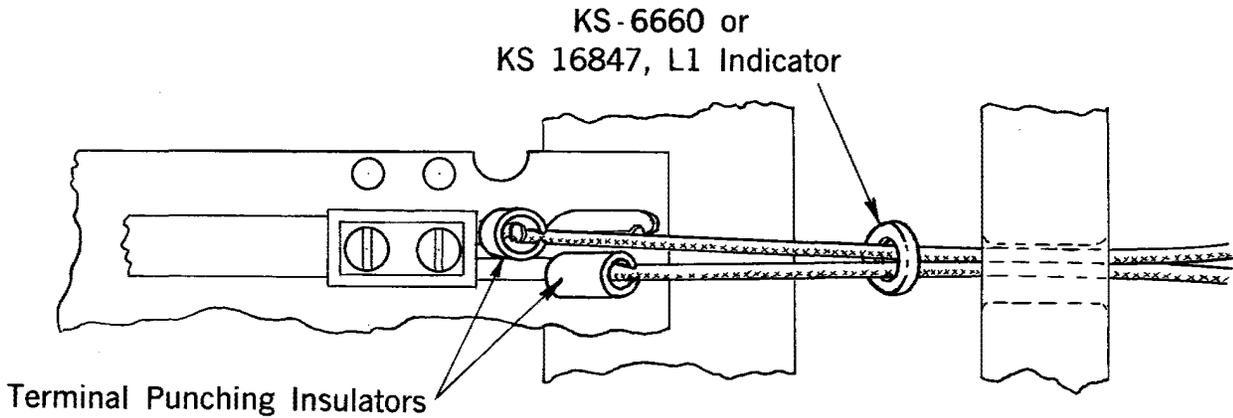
Indicator and Terminal Punching Insulators on Protector Mounting
